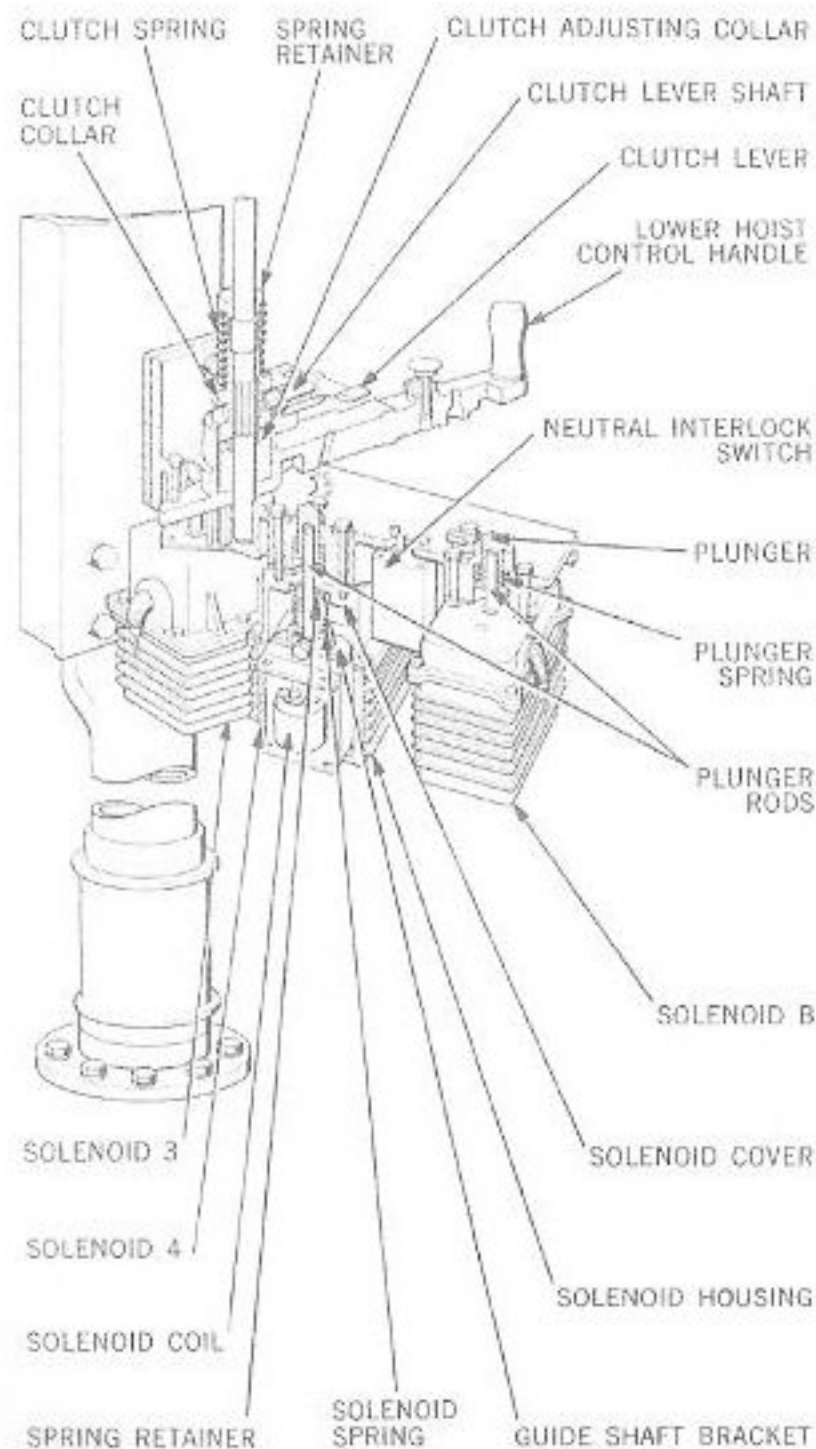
Lower Hoist Control Interlocks - Sectional View
